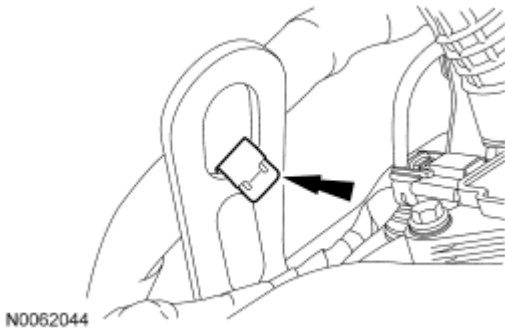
Locating PSP Hose Retainer From Engine Lifting Eye
